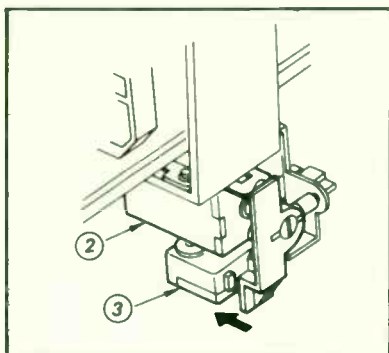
Tape end sensing machine diagram—rewind mode.
